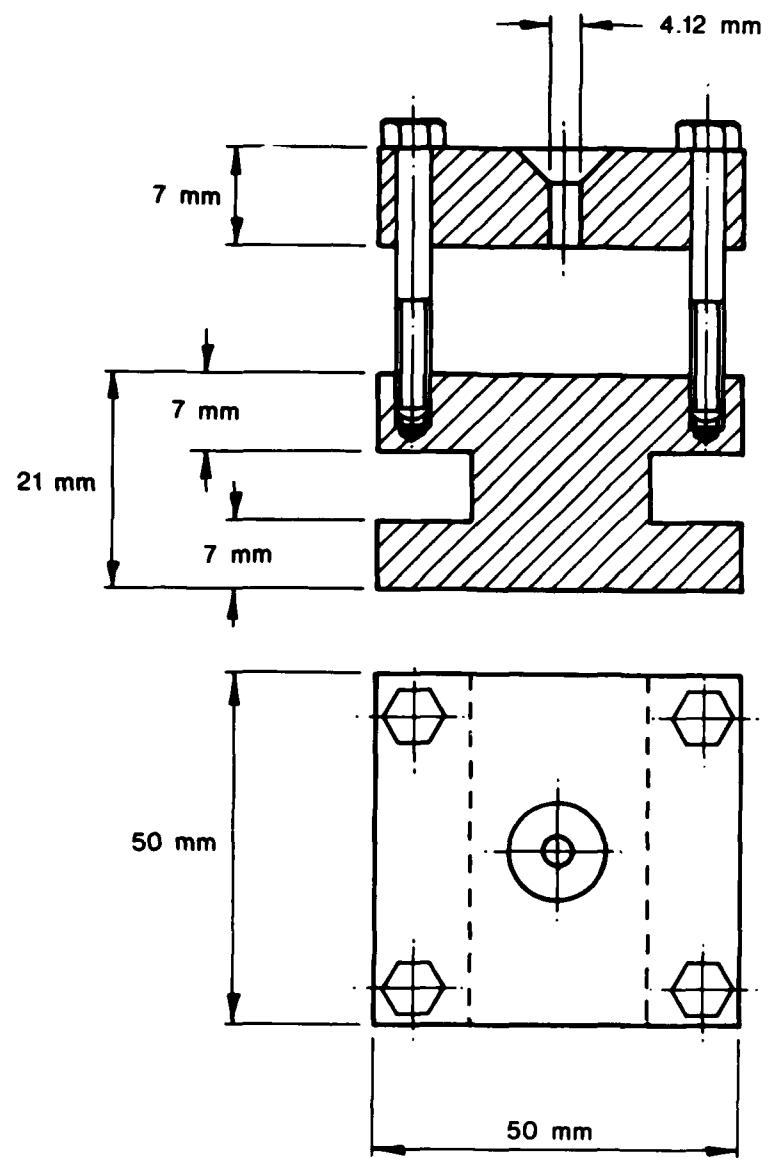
Pressing Mould for Explosive Filling of Multilayer Board.
